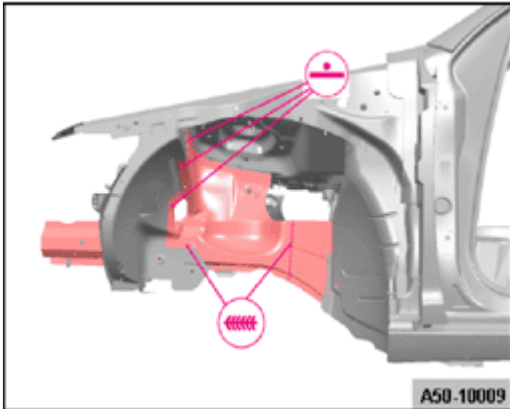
Welding Remainder Of Joint And Separating Cut
